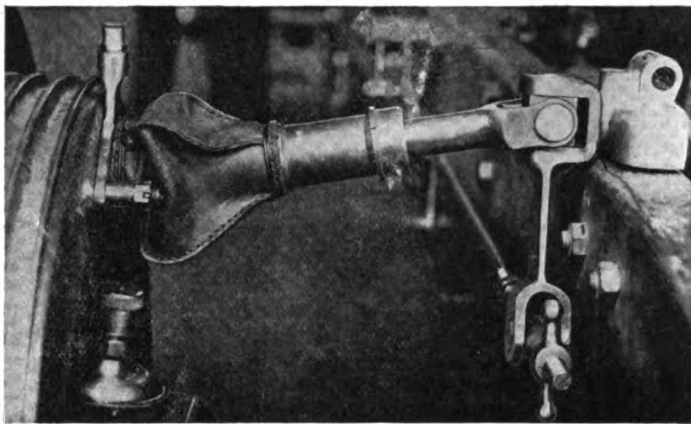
Detail of Darracq brake operating mechanism on front wheel.
